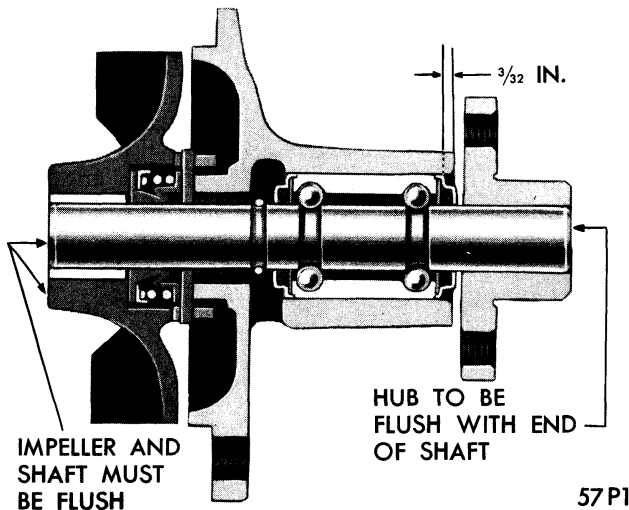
Cross-Sectional View of 6 Cylinder Engine Water Pump
